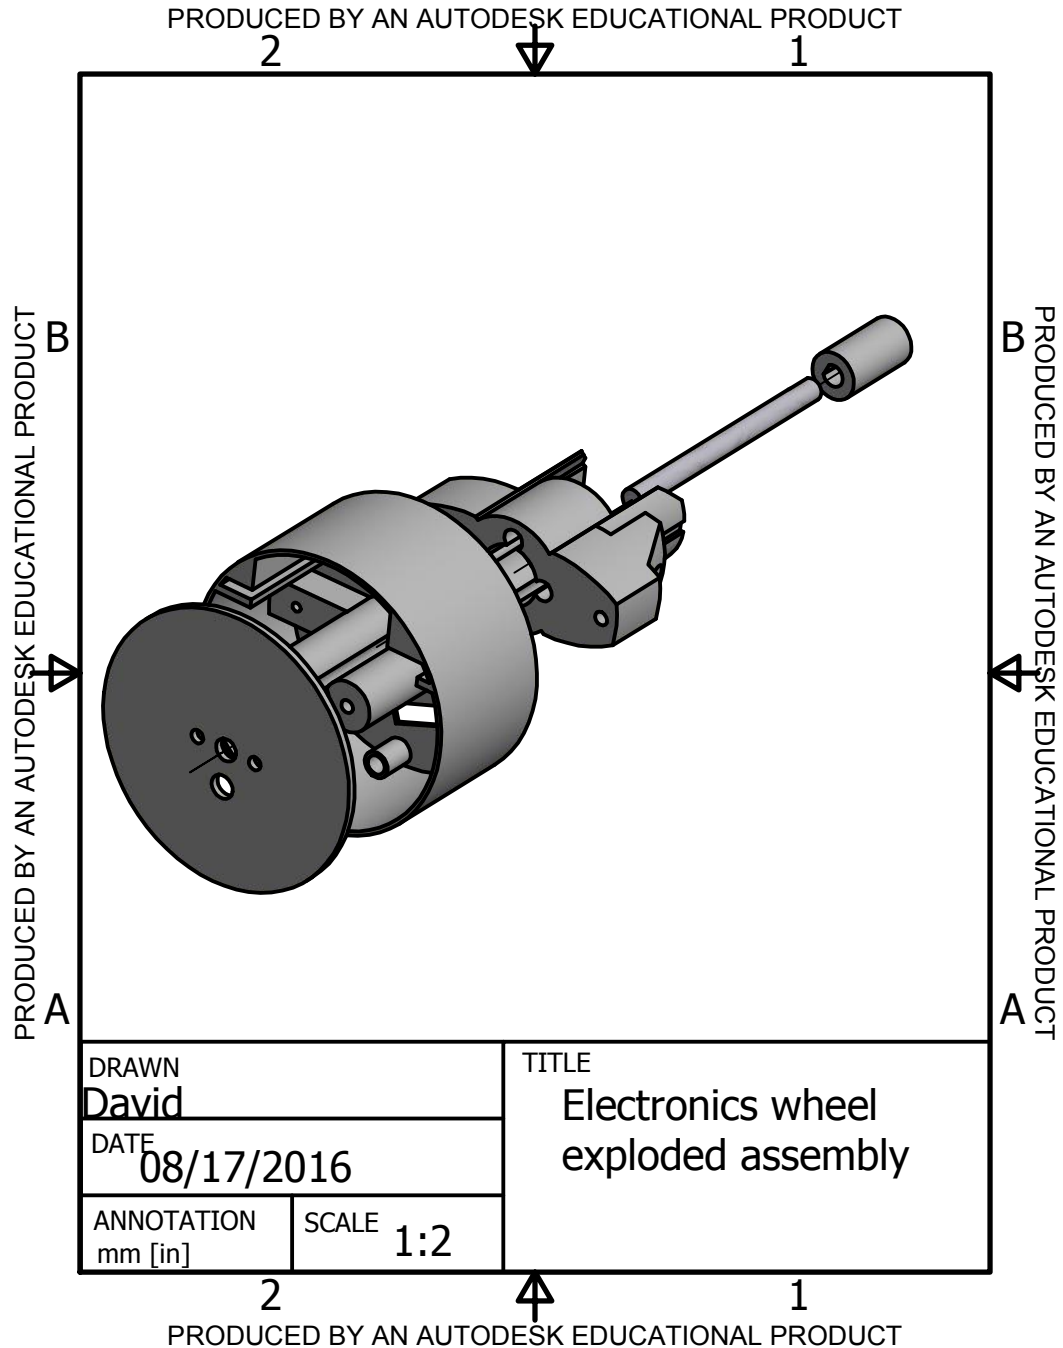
Exploded view illustrating how the electronics wheel is assembled. 6-32 screws fasten this wheel to the rotating components in the roller clutch. M3 screws connect the motor adapter to the motor. The rotor adapter is secured using 8-32 set screws (not pictured).
